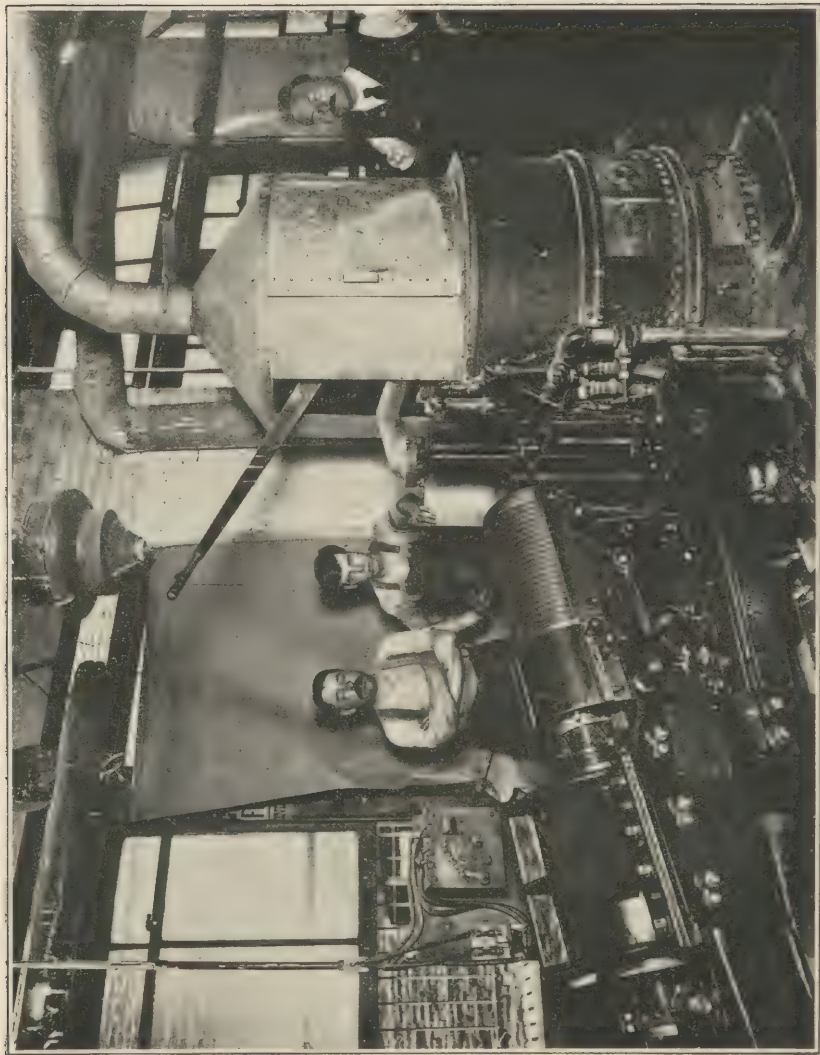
EXHAUST HOOD ON MELTING KETTLE IN STEREOTYPE ROOM, SHOWING SLOT FOR PUMP ACTION.
